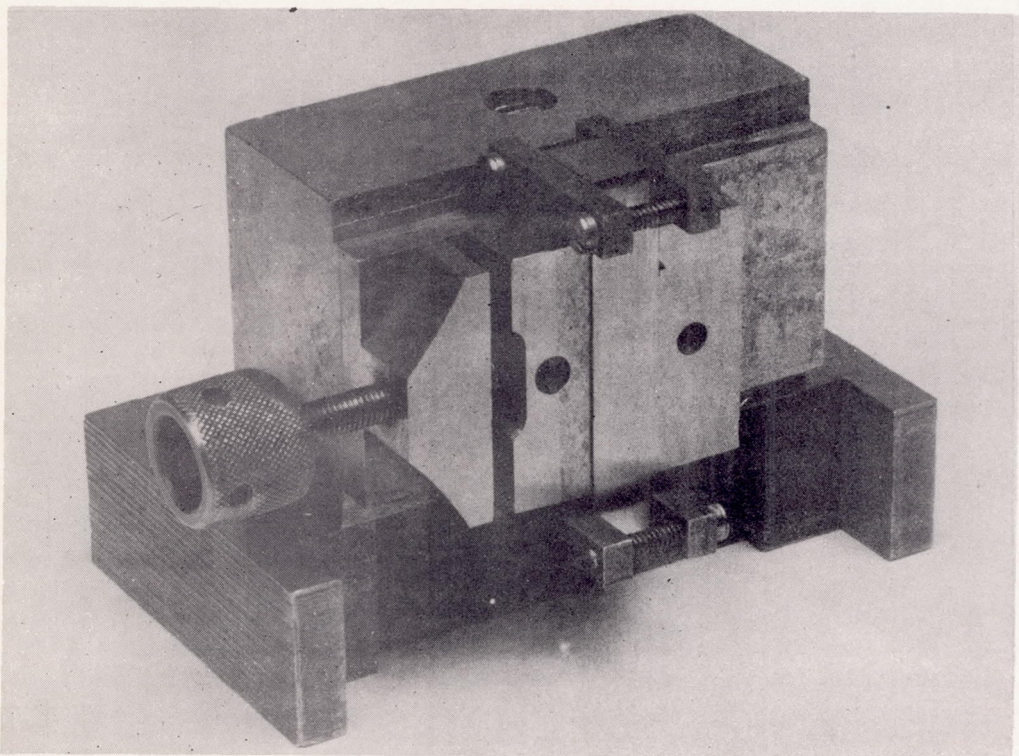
Pack of specimens in machining fixture ready for grinding one end.
